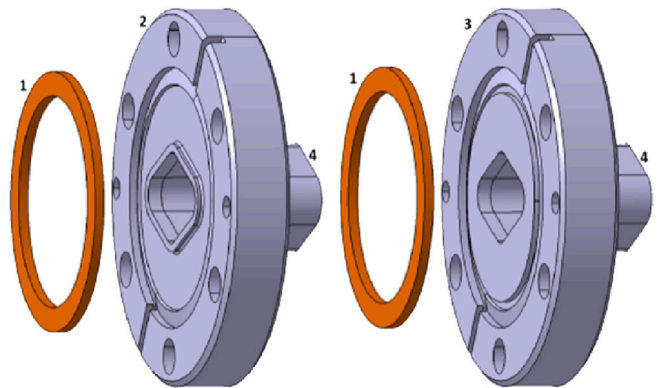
Mechanical drawing of the Spigot Flange Lip (2) and of the Spigot Flange Planar (3). The gasket (1) and the rhomboidal vacuum chamber of Elettra 2.0 (4) are also shown.
